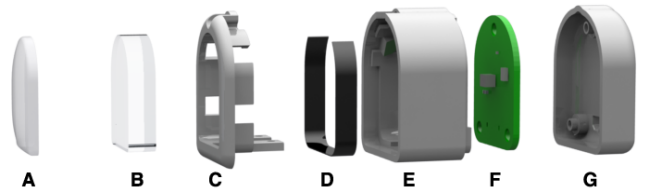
Exploded view of a DIGIT sensor. A) elastomer, B) acrylic window, C) snap-fit holder, D) lighting PCB, E) plastic housing, F) camera PCB, G) back housing [11]
